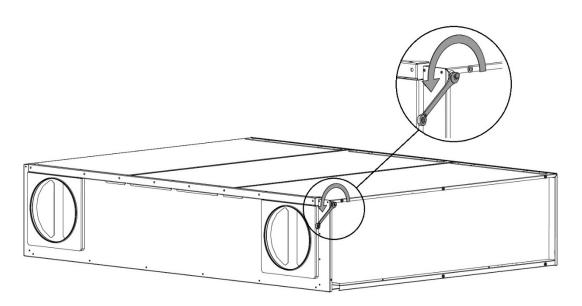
Disassemble the rear bracket, right-hand side seen from behind
